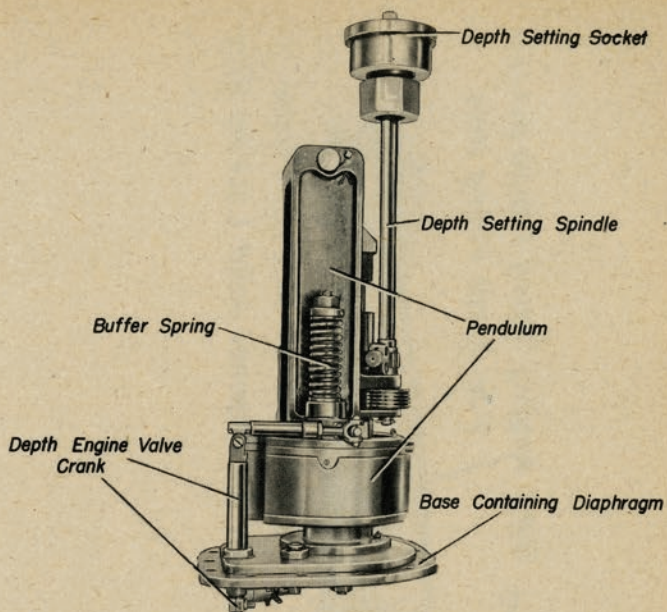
Torpedo Type 91 Mod I, Depth Mechanism
